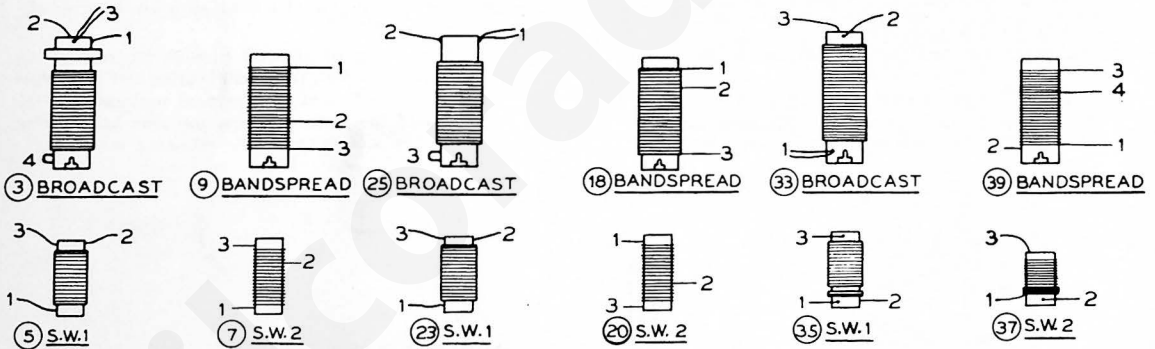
R. F. TRANSFORMER WIRING LOCATIONS
